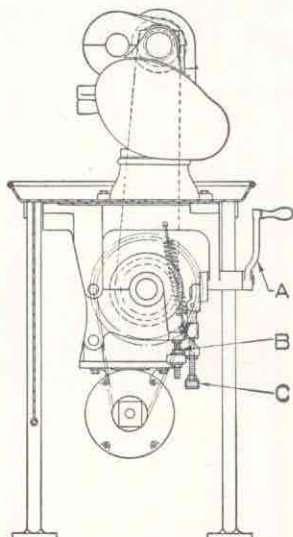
Underneath Motor Drive Arrangement for 10"-1" Collet Bench Lathes
